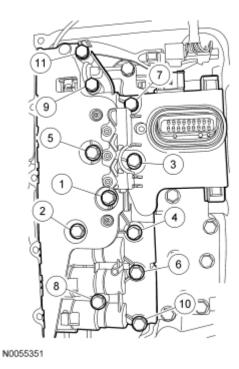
Tightening Solenoid Body Bolts In Sequence Courtesy of FORD MOTOR CO.
